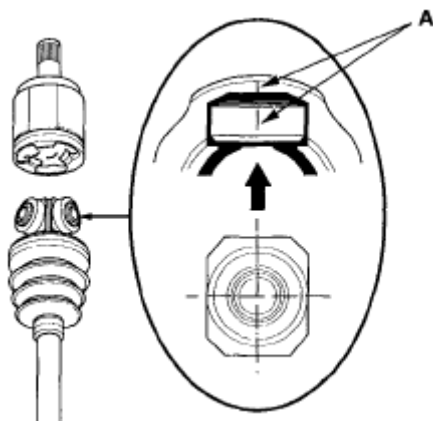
Identifying Marks On Inboard Joint And Rollers
